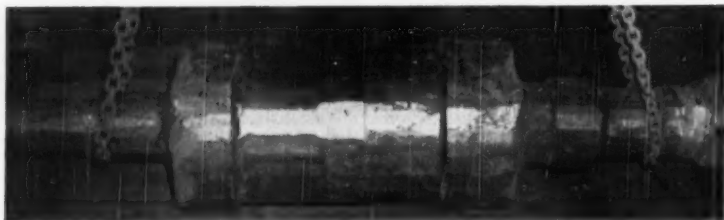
FORGED STEAM-TURBINE ROTOR READY FOR HEAT-TREATMENT
